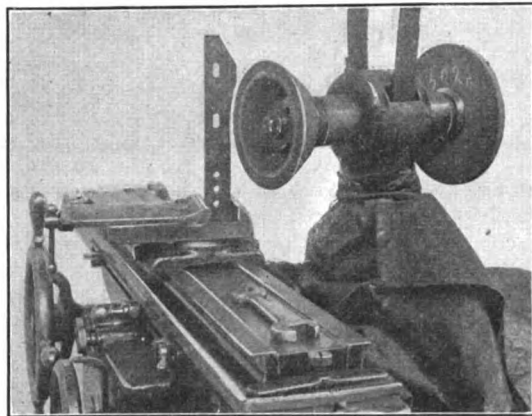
GRINDING A LARGE RADIUS WITH A SMALL WHEEL
